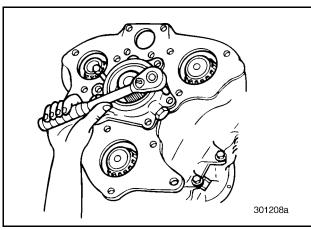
Removing Rear Mainshaft Bearing Cover Using Jackscrews
